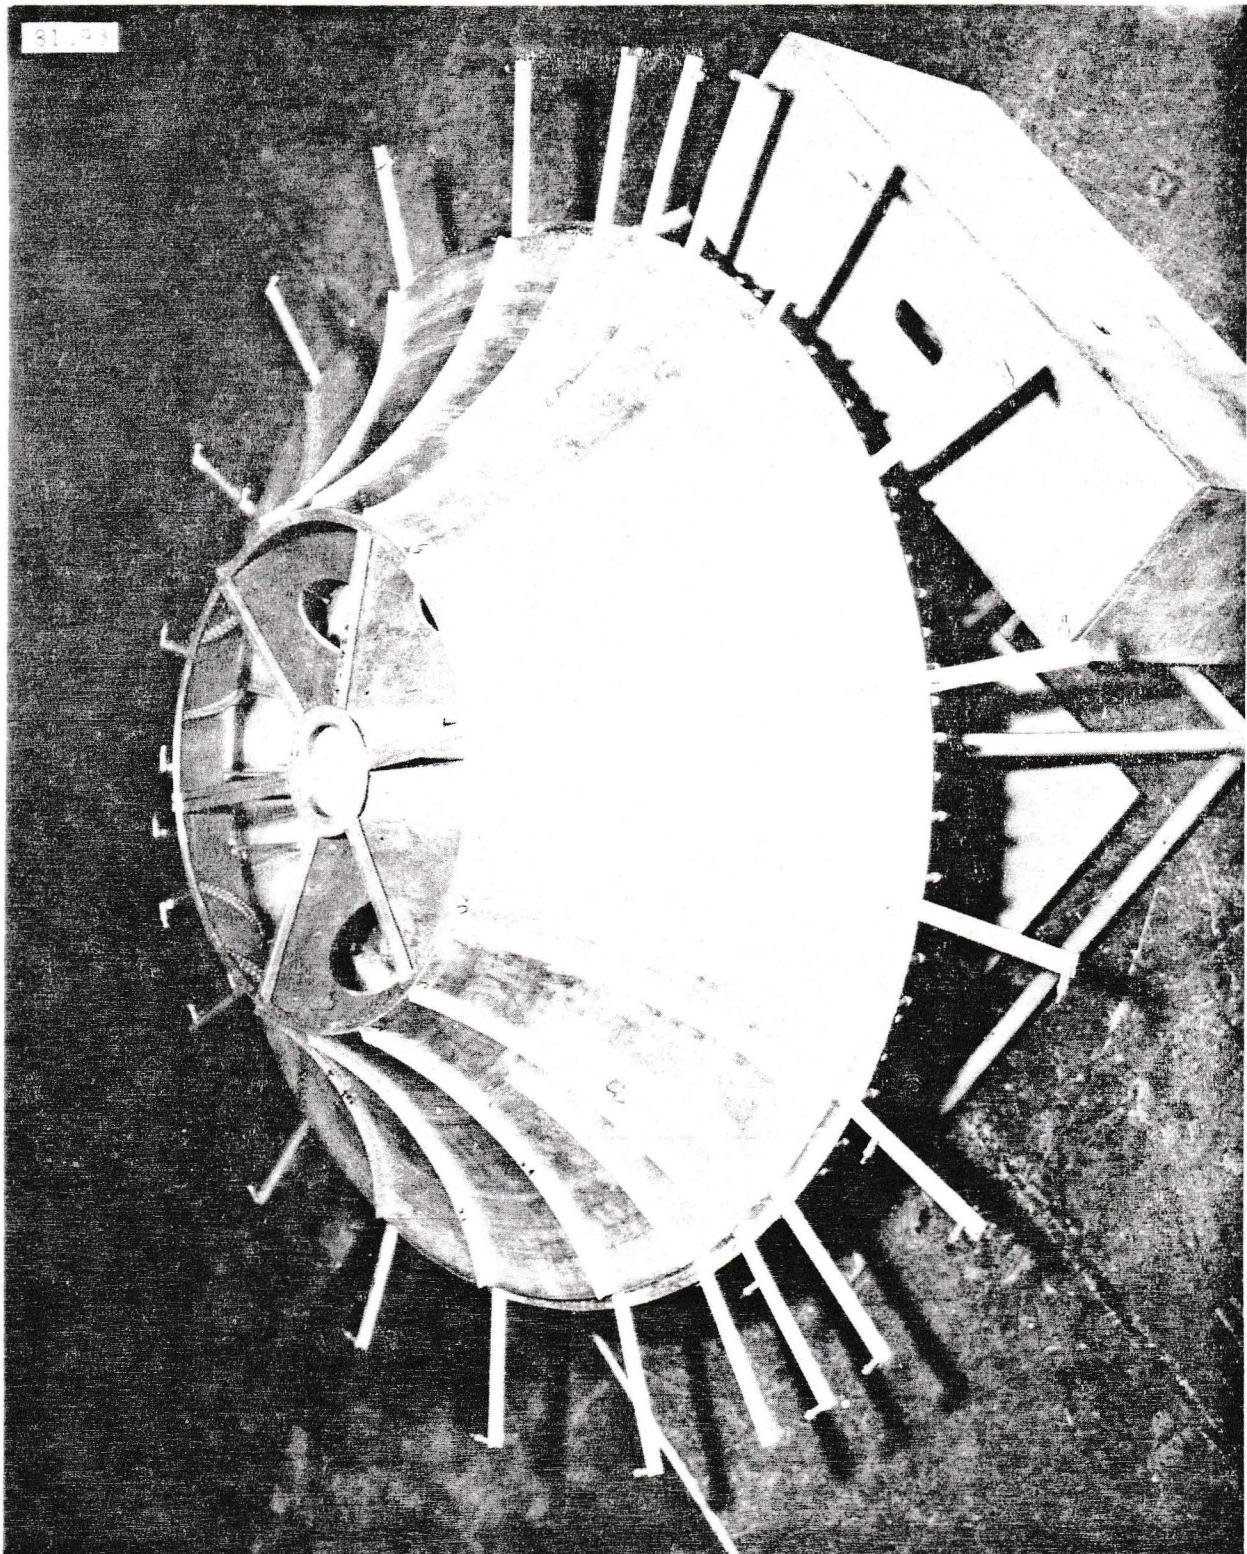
CENTRE STRUCTURE ASSEMBLY FOR TEST VEHICLE
